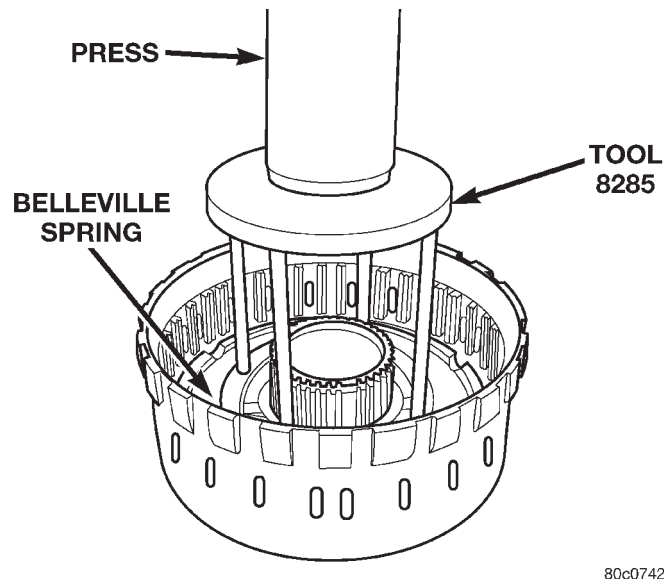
Compress Low/Reverse Belleville Spring Using Tool 8285
